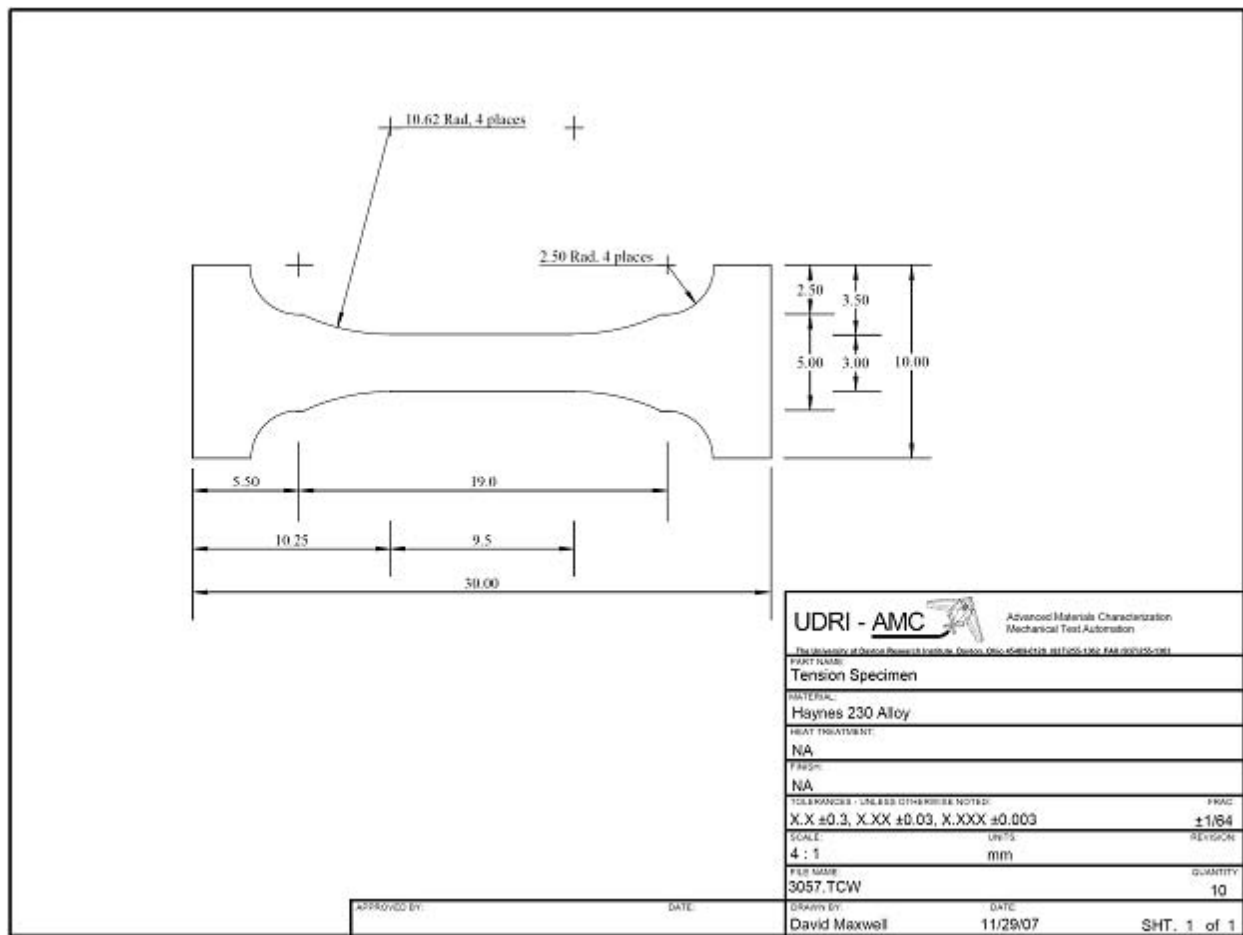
CAD drawing for the final specimen design (David Maxwell).
